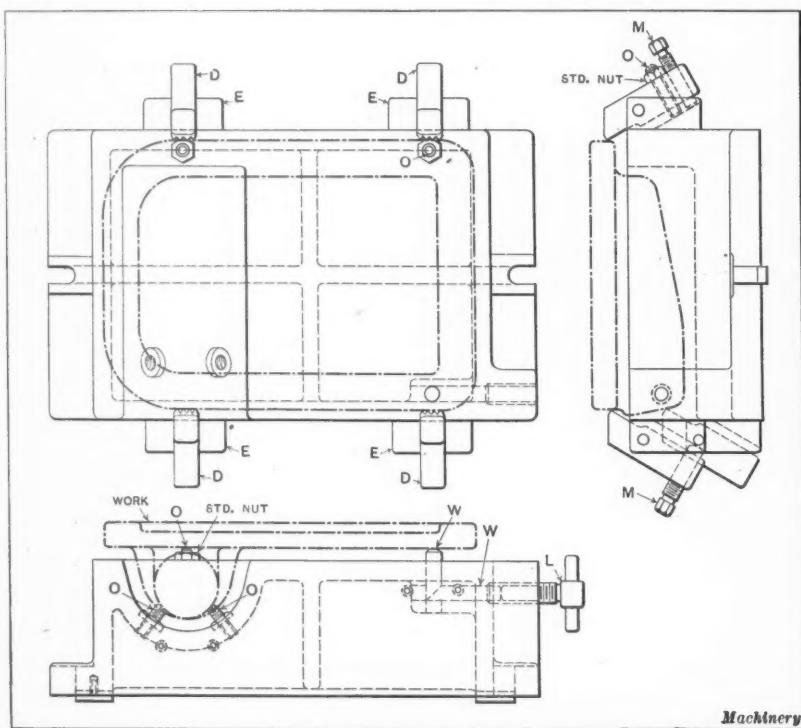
Preliminary Drawing of a Milling Fixture developed for a Customer, in which Standard Details are used
